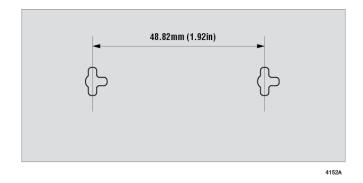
Wall Mounting Hole Locations for Up or Down Facing Ports
